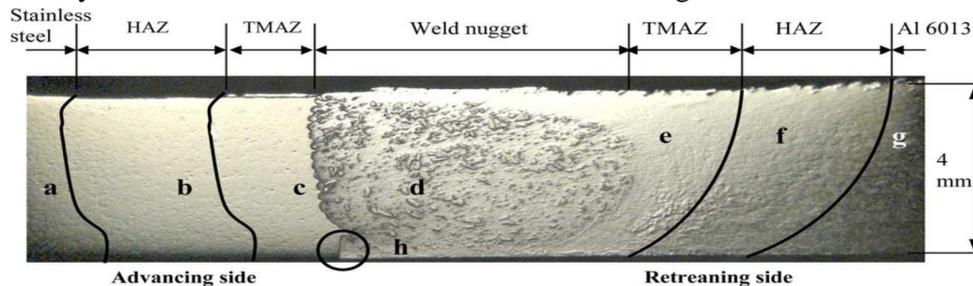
Macroscopic overview of the cross-section of the friction stir welded Al 6013-T4 alloy to X5CrNi18-10 stainless steel [10]
